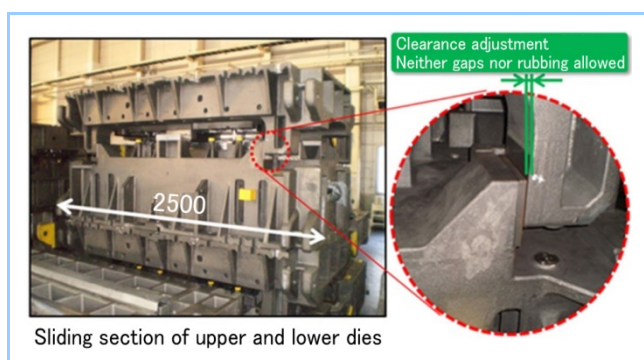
Images showing sliding section for upper/lower die clearance adjustment
